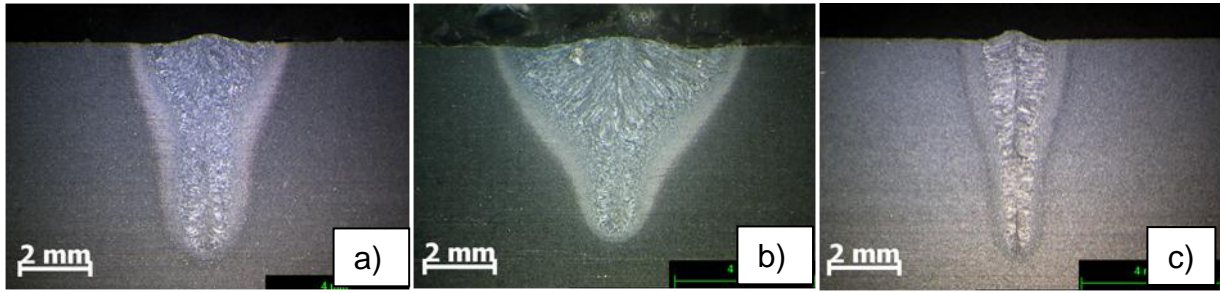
Macrographs for combination of parameters required for 6 mm depth of penetration: a) laser welding 4 kW, 1 m min^{-1} (240 J mm^{-1}); b) hybrid welding 7 kW, 1 m min^{-1} (420 J mm^{-1}); c) laser welding 7 kW, 3 m min^{-1} (140 J mm^{-1})
